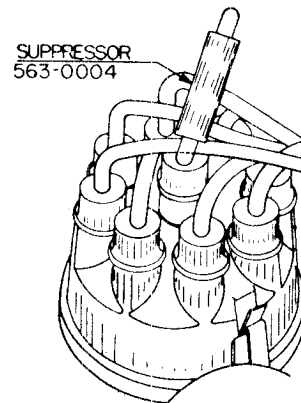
DISTRIBUTOR SUPPRESSOR 563-0004
